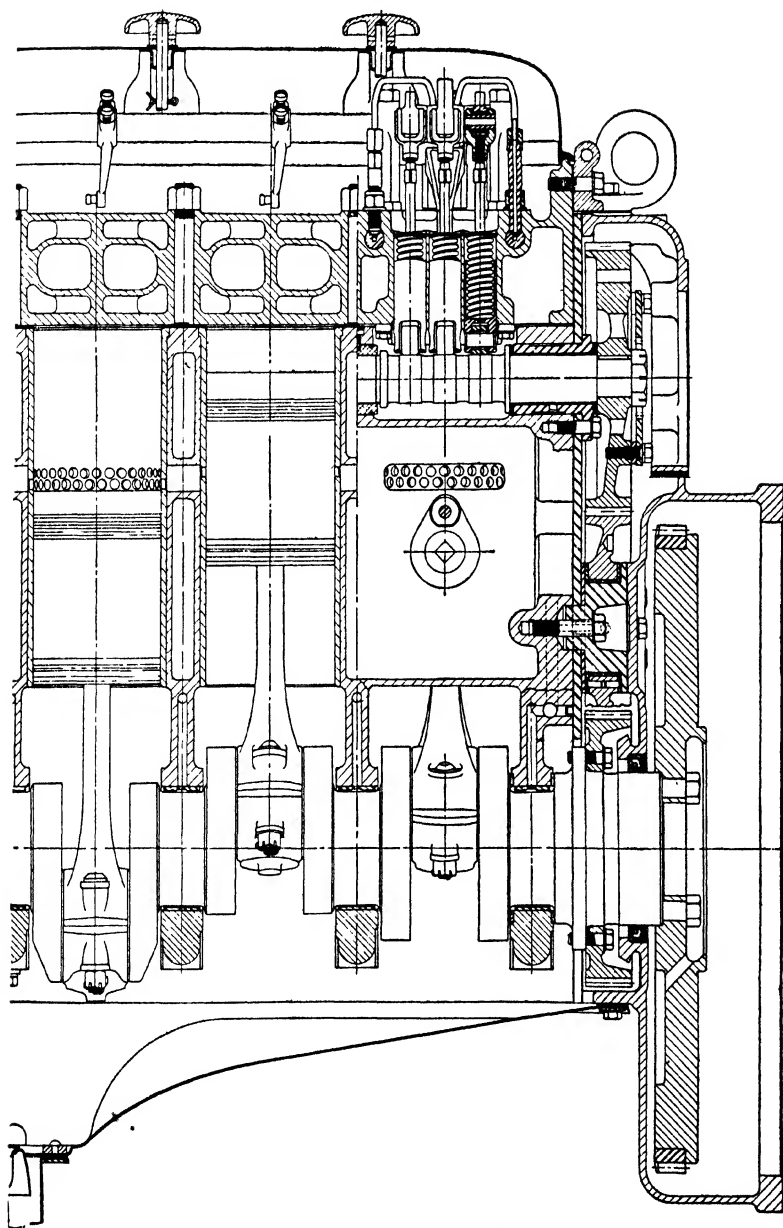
B.—LONGITUDINAL SECTION OF GENERAL MOTORS TYPE 6-71 ENGINE, REAR HALF.
